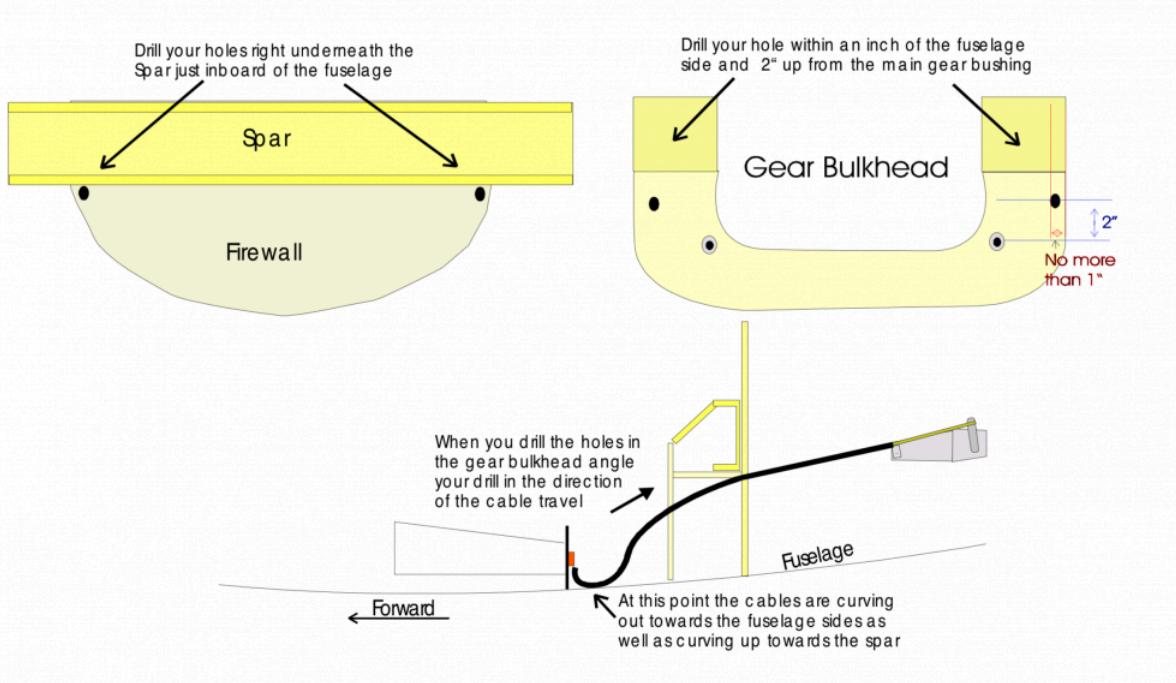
Aileron Cable Routing (Fixed Gear)
